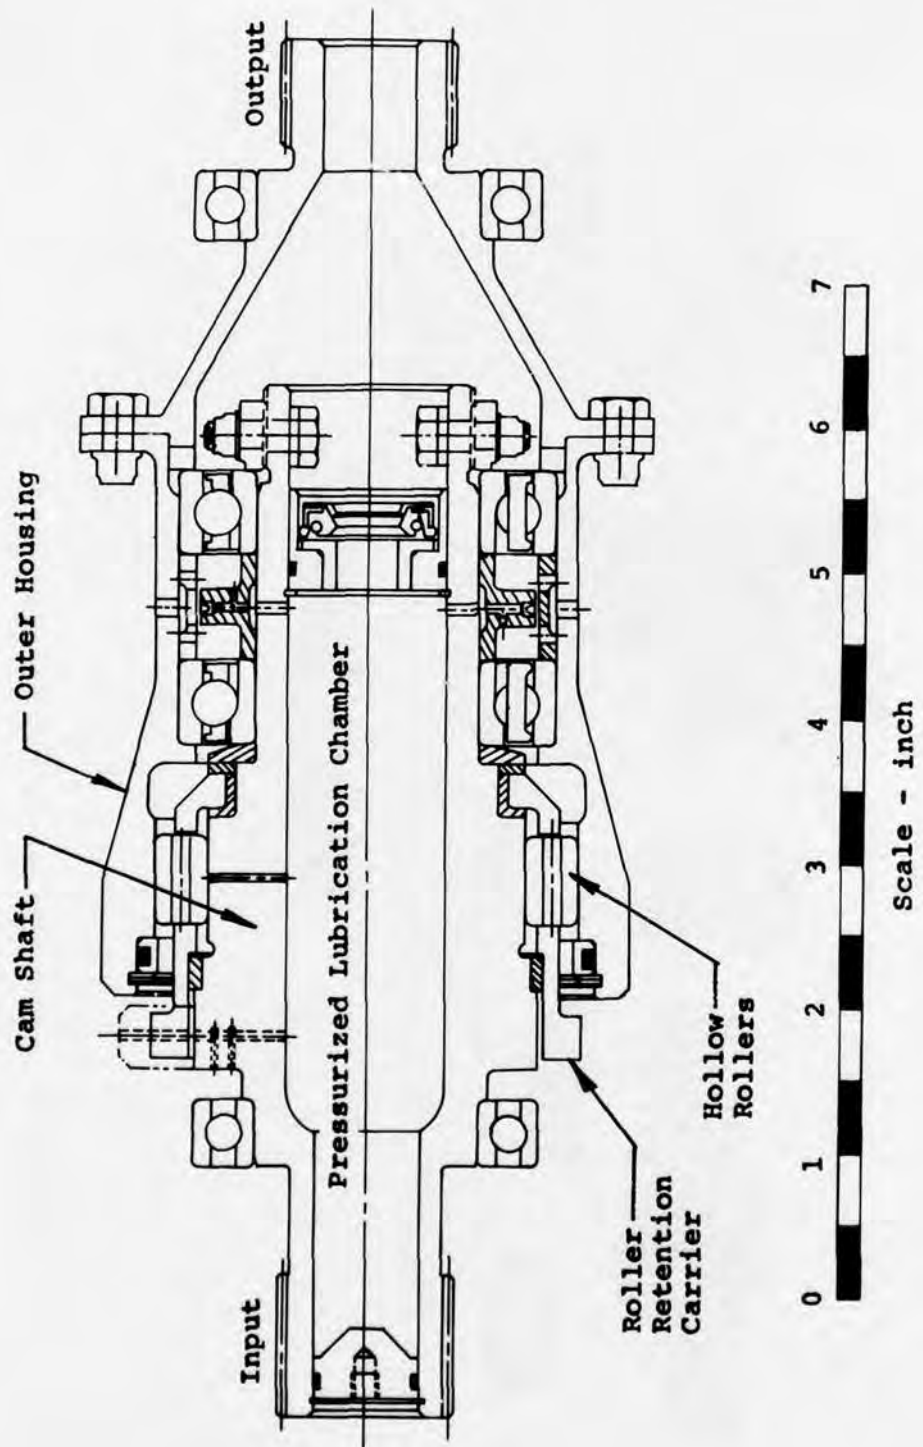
Ramp-Roller Clutch Design, Cross Section.
